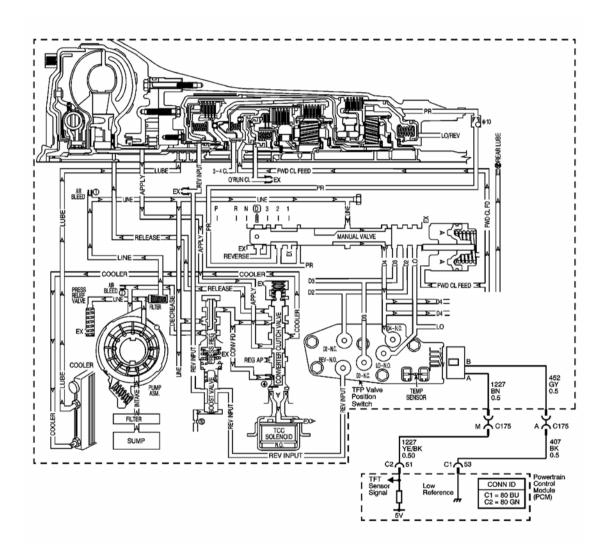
Filter, Control Valve Body Assembly, Transmission Case & Oil Pump Assembly Courtesy of GENERAL MOTORS CORP.
